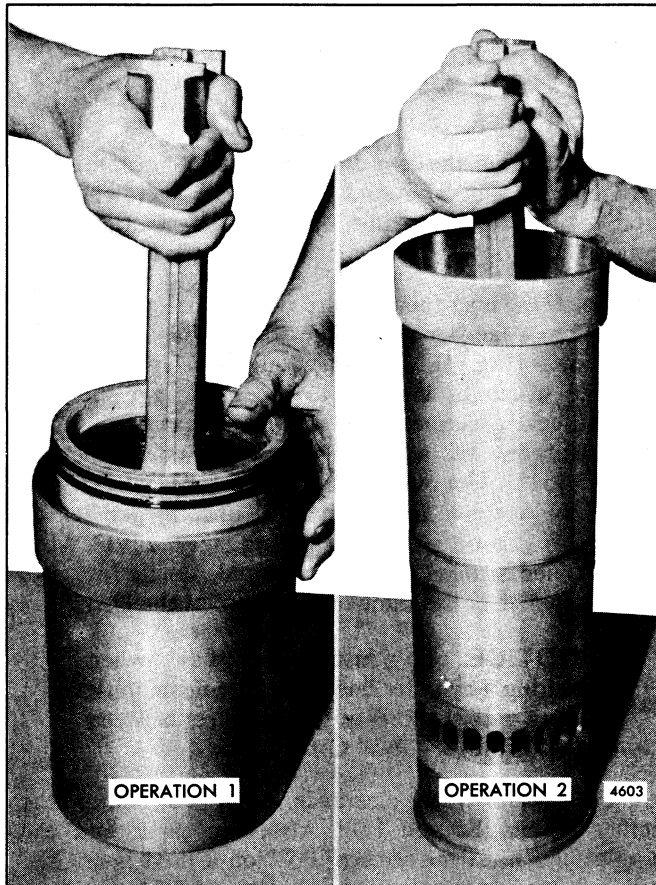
Installing Piston and Connecting Rod Assembly in Ring Compressor and Cylinder Liner
